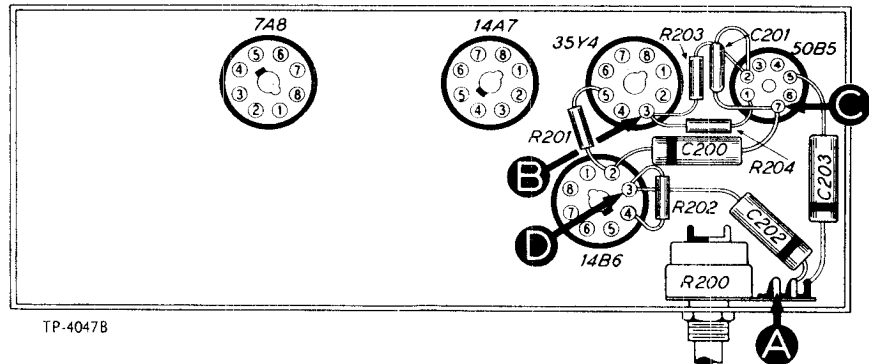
BOTTOM VIEW, SHOWING SECTION 2 TEST POINTS
